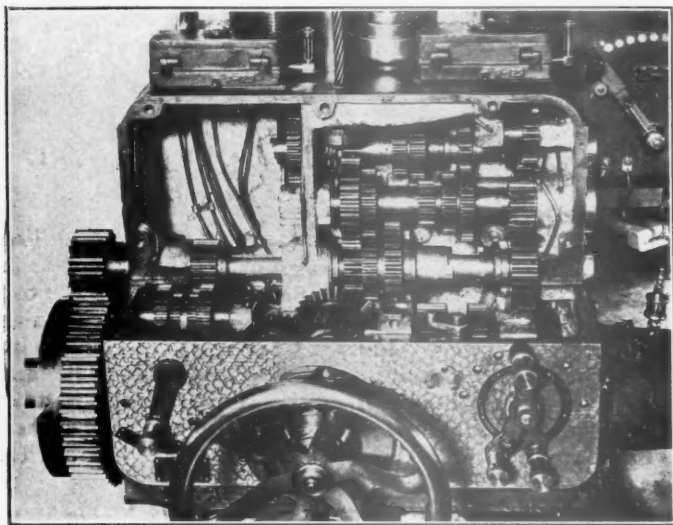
Part of Gear Box Removed Showing Sliding Transmission
